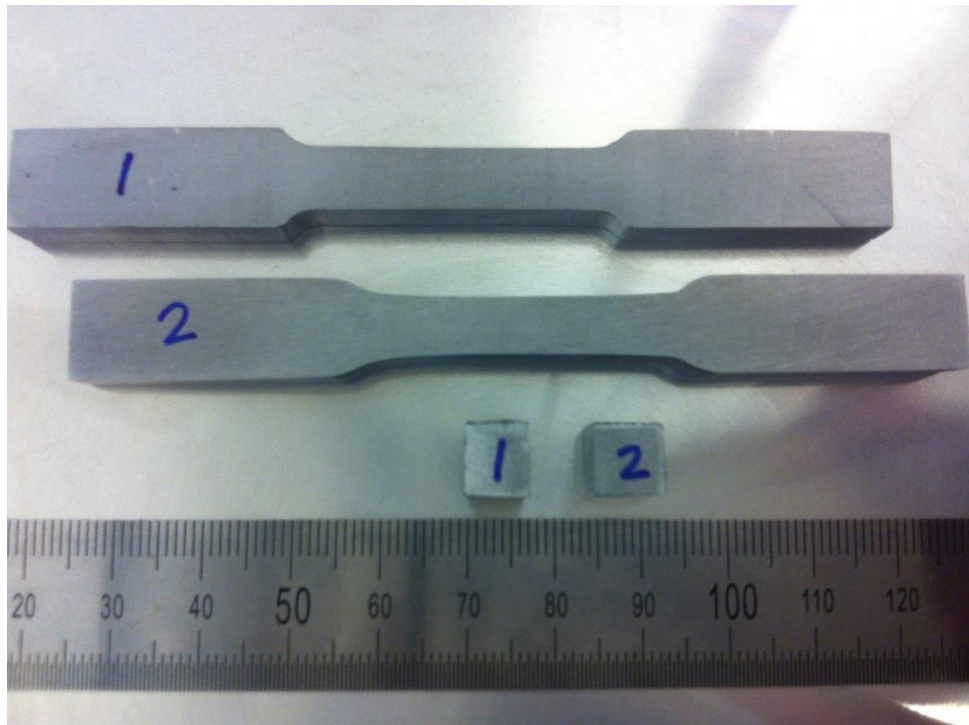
The grinding composite samples after wire electrical discharge machining (WEDM).
